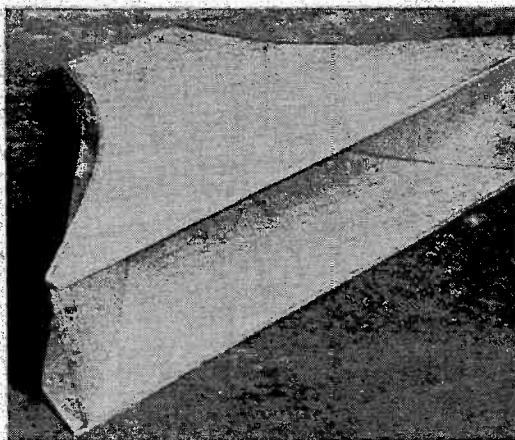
Over-all view of the completed 200-cps horn assembly before painting.
